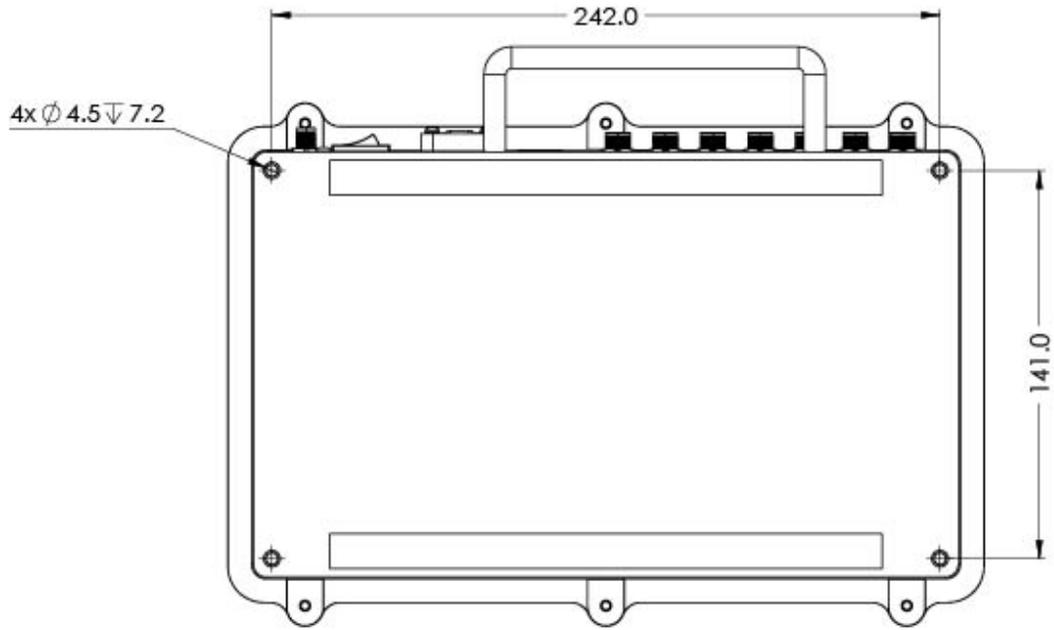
Robotiq Controller technical dimensions - bottom view
